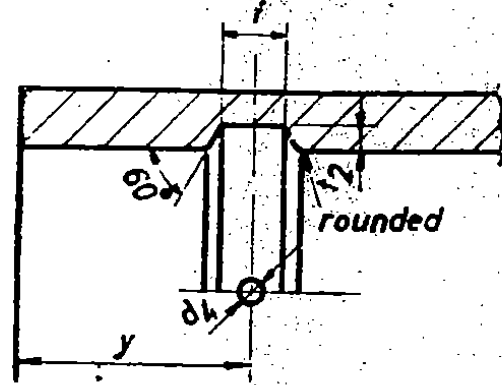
HYDROSTATIC JOURNAL BEARING WITH 4 - POCKETS
